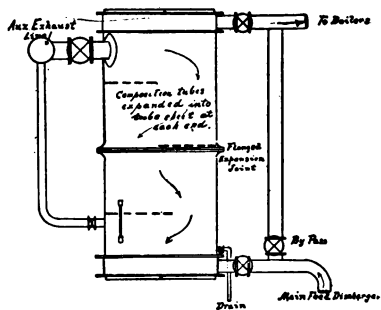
Closed Heater on Discharge Side of Feed Pump.
